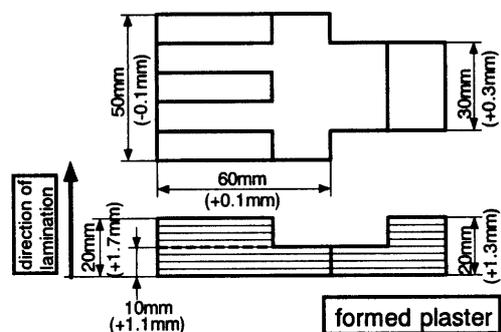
Size change of casting from sheet lamination model for formed plaster mold
